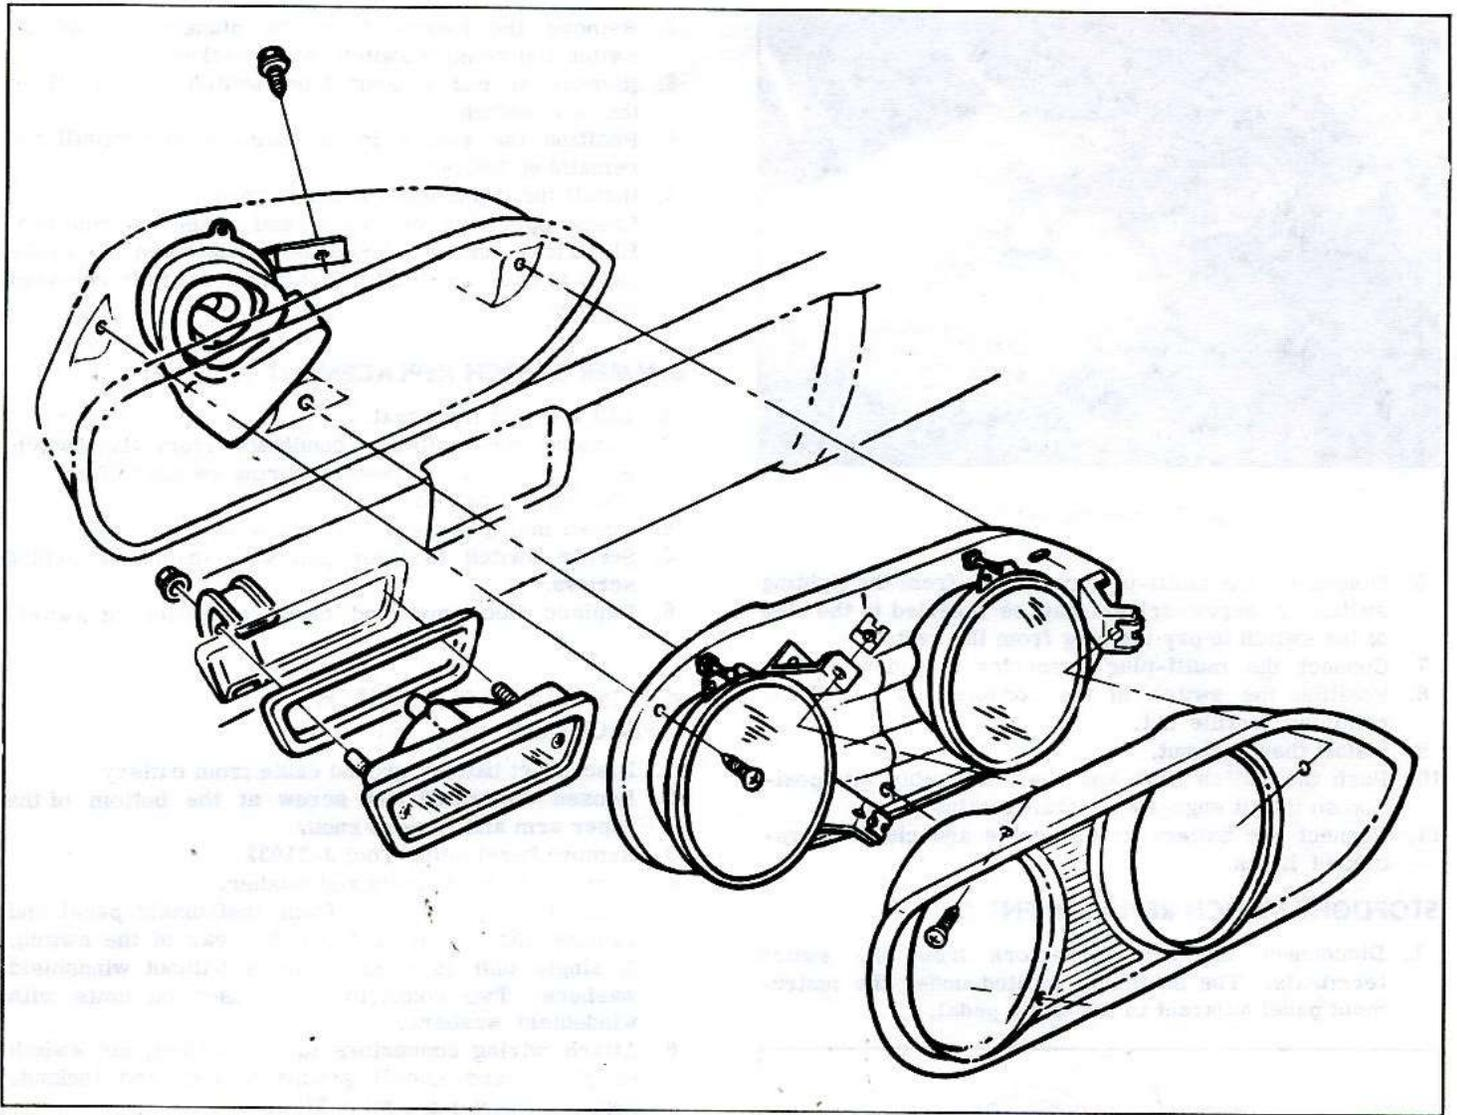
Headlamp, Parking Lamp and Horn Assemblies
